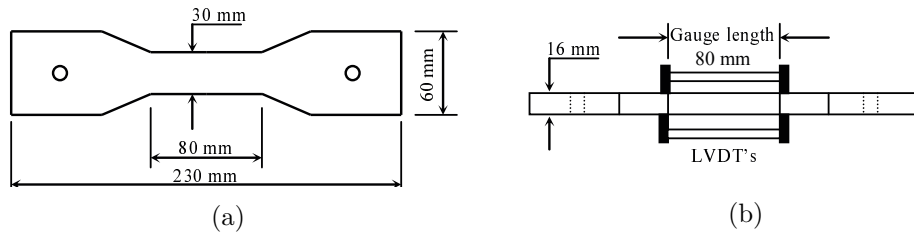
Dimensions of the flat dumbbell specimen, (a) Top view; (b) Side view.
